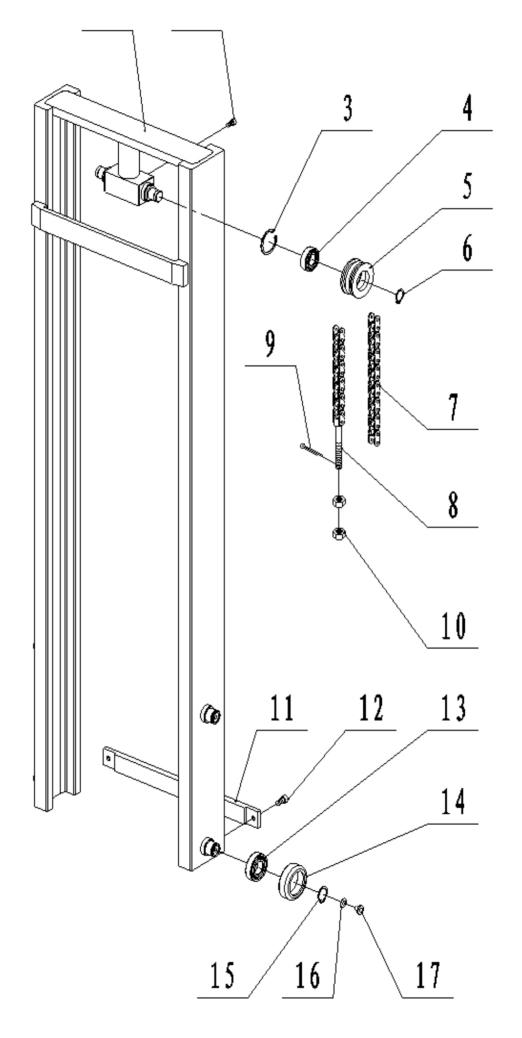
Spare parts for inner mast 2500-3500 mm/ Lista ricambi per montante interno 2500-3500 mm
